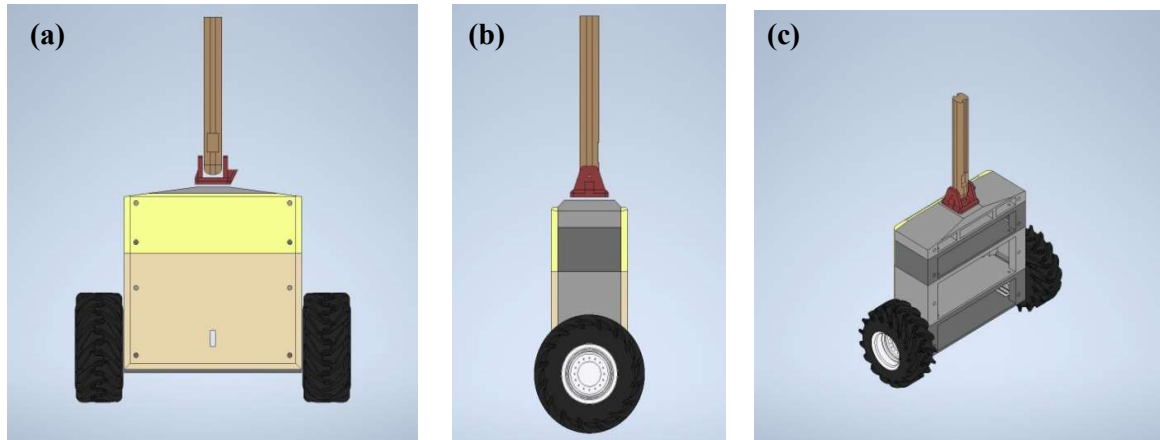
Illustration of the Mk3 version – (a) Front view; (b) Side view; (c) Isometric view of the assembly of the four 3D printable blocks
